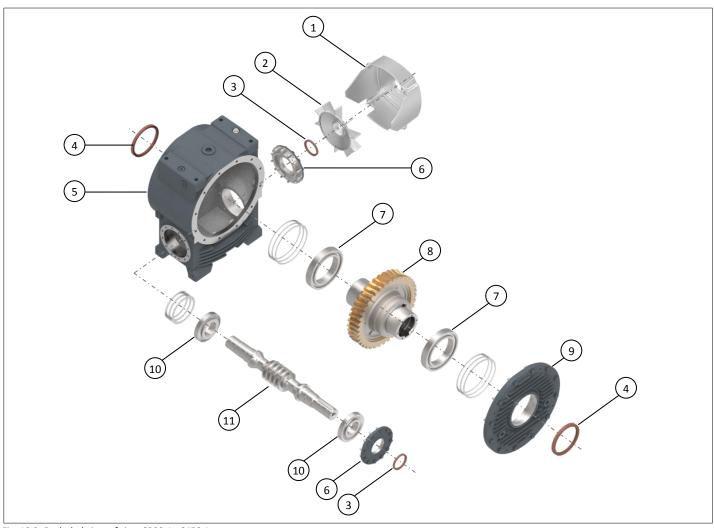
Exploded view of sizes S200.1 - S450.1
